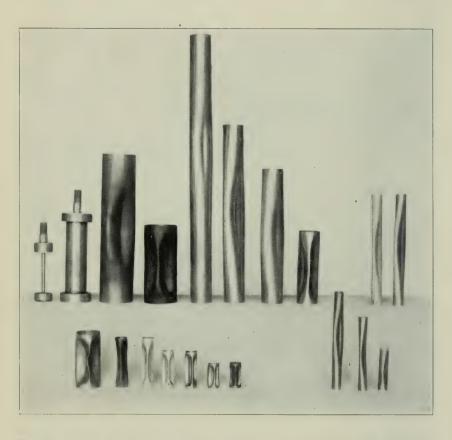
TUBES THAT HAVE BEEN COLLAPSED. ON THE LEFT THE MOUNTING ARRANGEMENT IS SHOWN. LONG TUBES COLLAPSE IN TWO LOBES,
